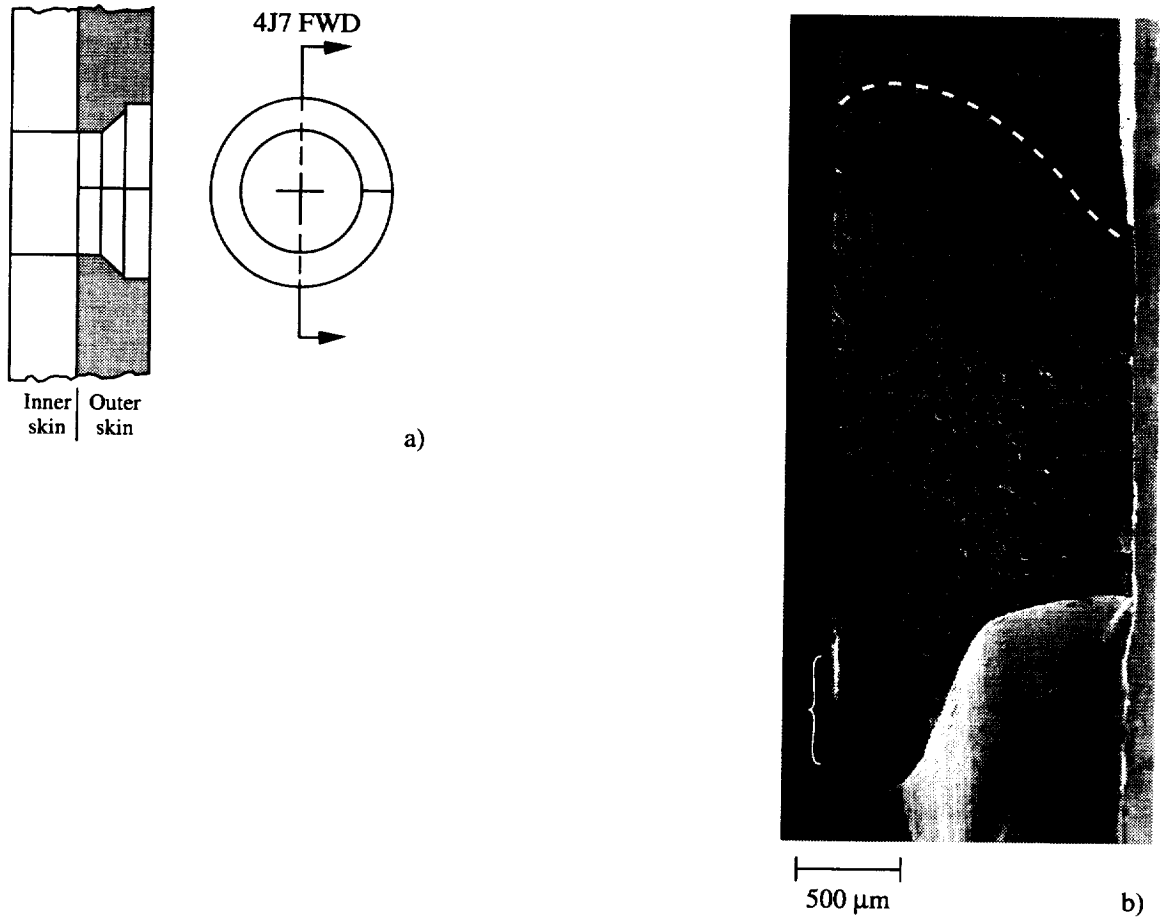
a) The schematic shows the rivet hole 4J7 configuration and the location of the outer skin fatigue crack oriented in the forward direction and about the 3 o'clock position. b) The SEM micrograph shows the fatigue crack fracture surface located at the outer skin rivet hole (bottom). The bracket marks the likely region of crack initiation and the dashed line marks the fatigue crack front.
